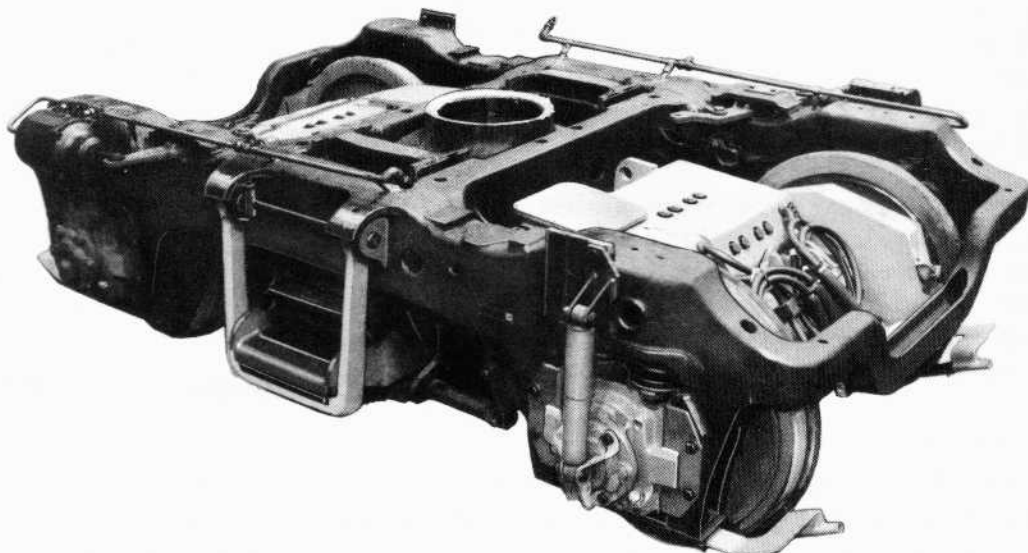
GP Truck Assembly With Single Shoe Brake Rigging
